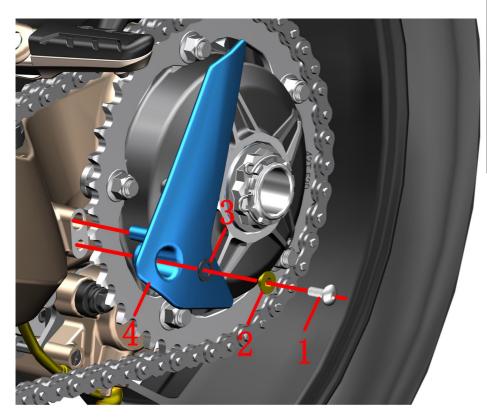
Rear wheel, swinging		Sprocket baffle	CHK	(0)
